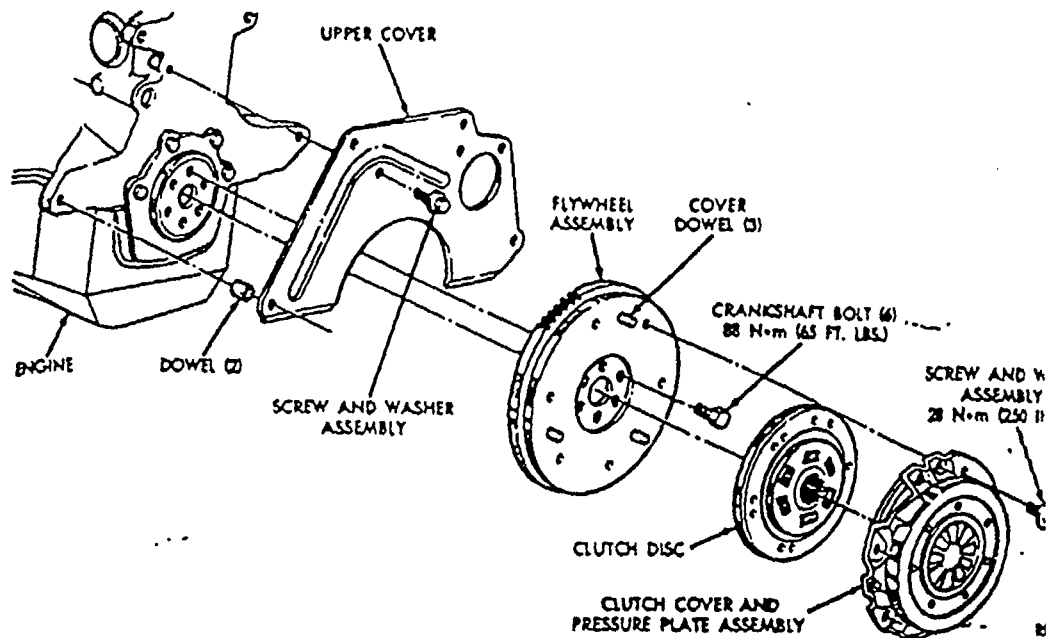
A-460, A-465, and A-525 Manual Transaxle Clutch—Disassembled (2.2L Engine)
